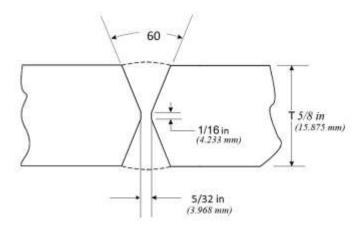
Tandem Wire Weld Joint Geometry
